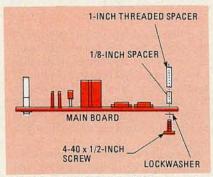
HOW THE ONE-INCH and 1/6-inch spacers are mounted on the main board.
